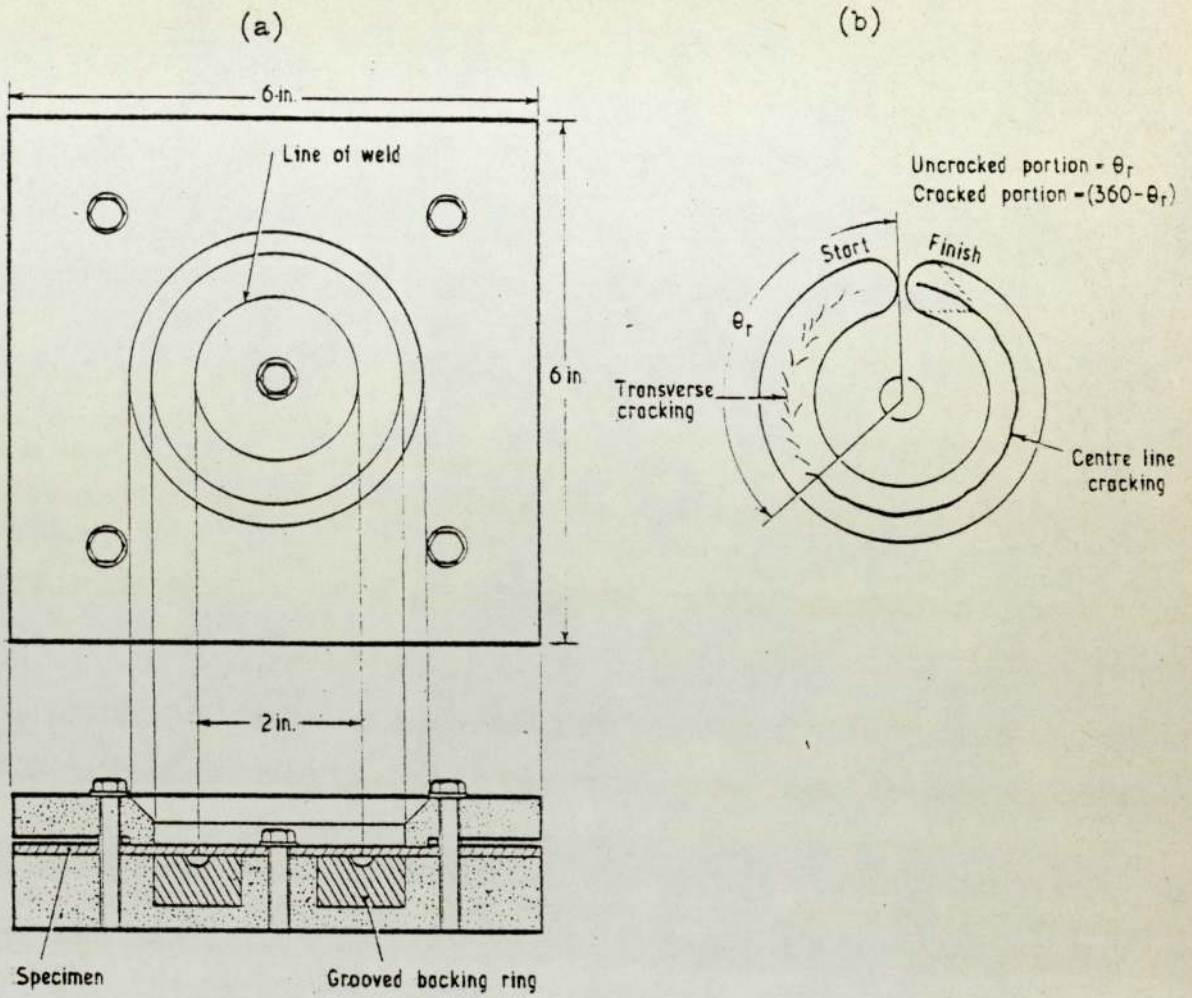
Illustration of Circular Patch Test. (a) Jig for the test; (b) type, location and measurement of cracking<sup>59</sup>).
